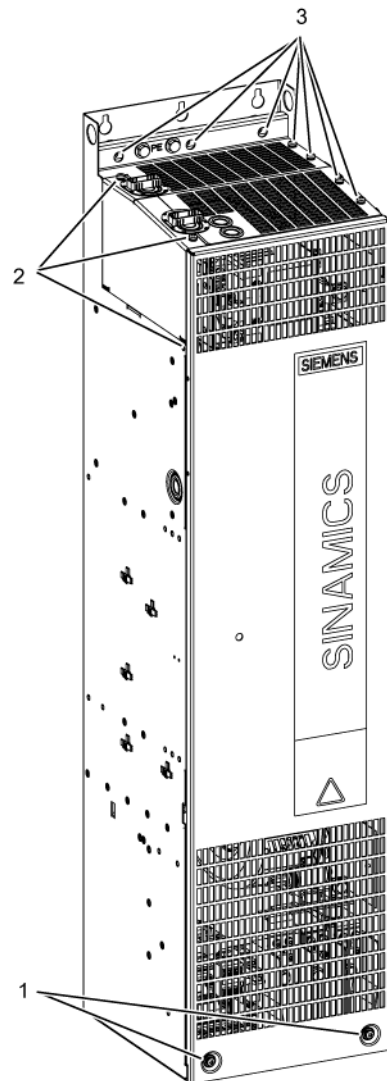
Installing the Braking Module in an Active Line Module / Motor Module, frame size FX – steps 1 - 3
